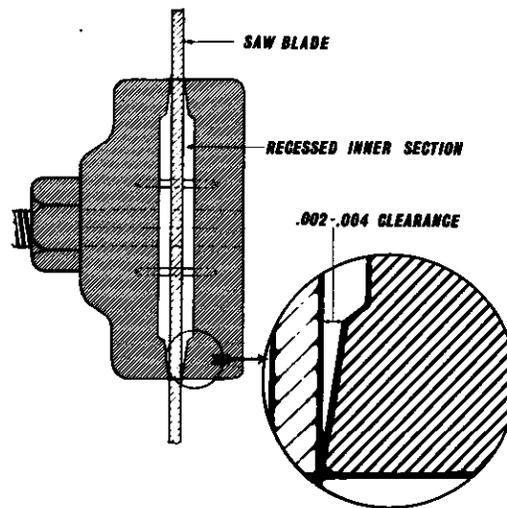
To insure proper support of the saw blade, collars should be machined with a .002- to .004-inch radial taper on their bearing surface toward the recess.
